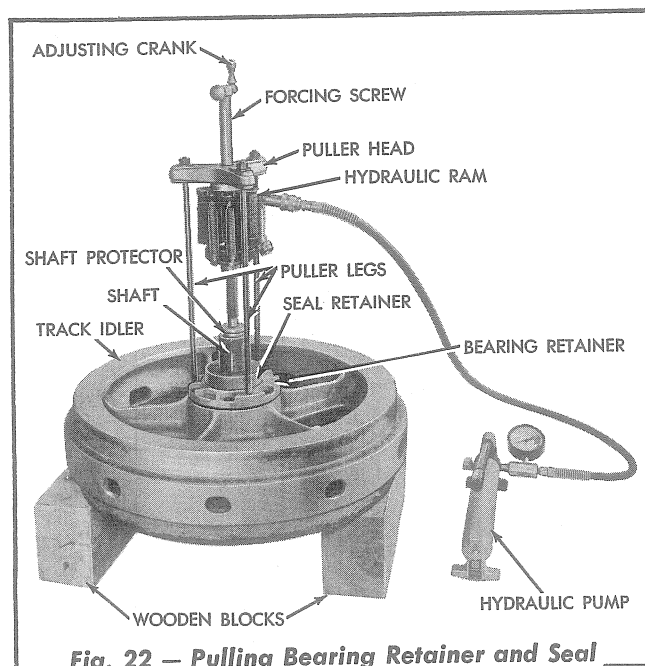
Pulling Bearing Retainer and Seal Retainer from Track Idler Shaft
